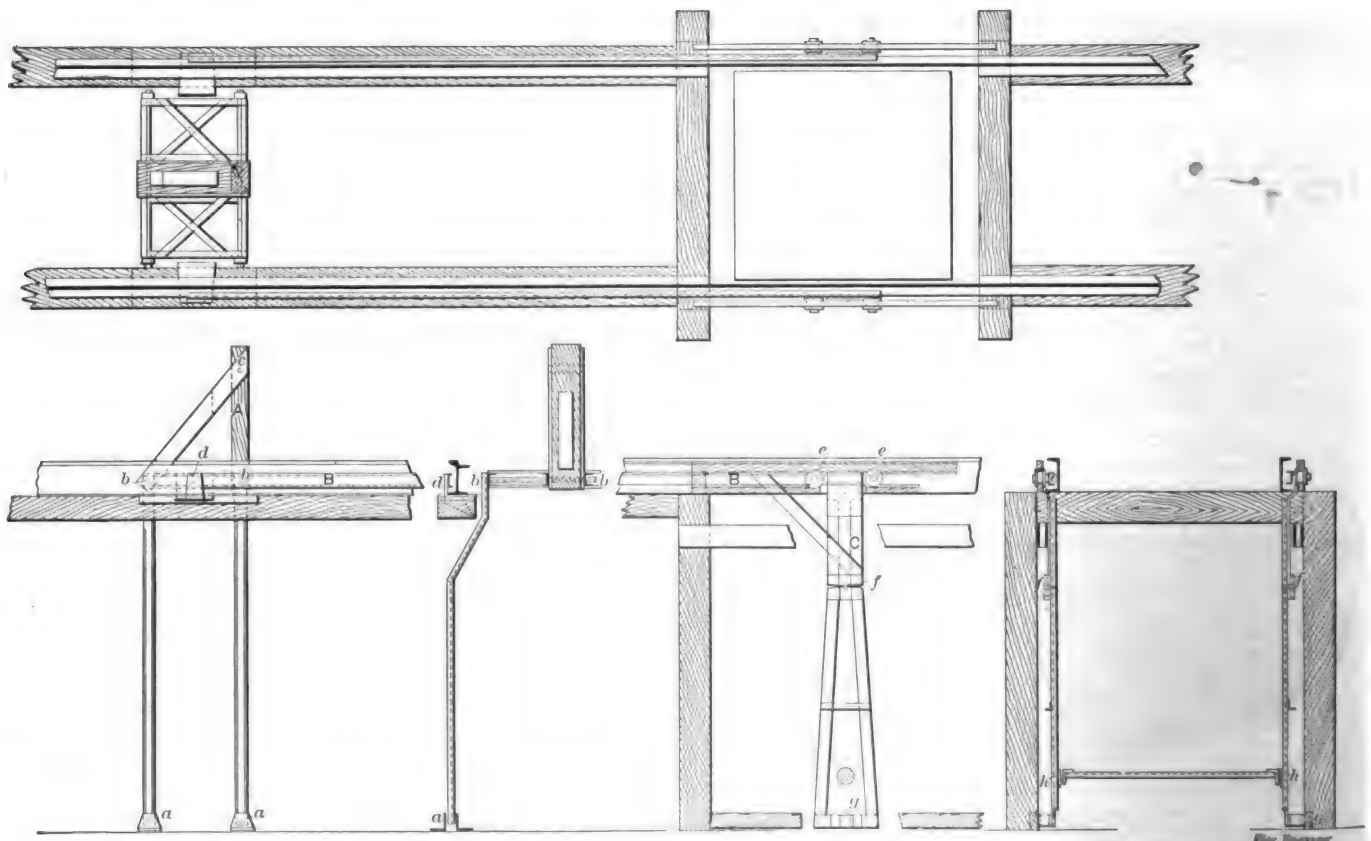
ARRANGEMENT FOR CENTERING STORAGE BATTERIES UNDER CAR TRUCK.—PLAN SIDE ELEVATION AND SECTION.
